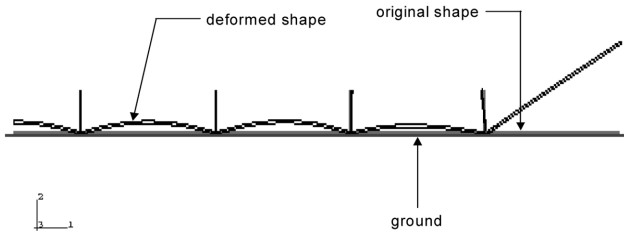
Deformed shape due to fillet welding for Model-D2
